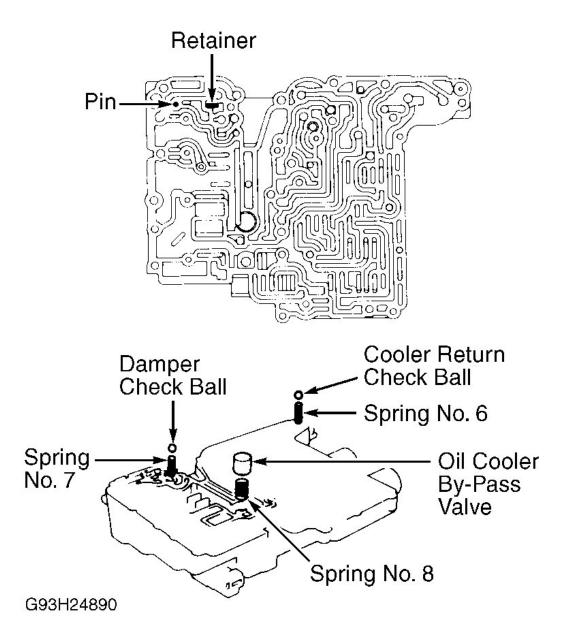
Identifying Lower Valve Body Check Ball, Pin, Spring & Retainer Locations (A-46DE & A-46DF)
